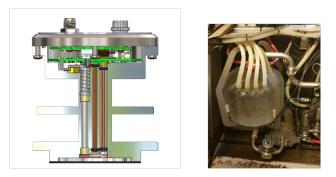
The D20 drawing (left). Mounted on a milking machine to the right (at the bottom in the photo)
